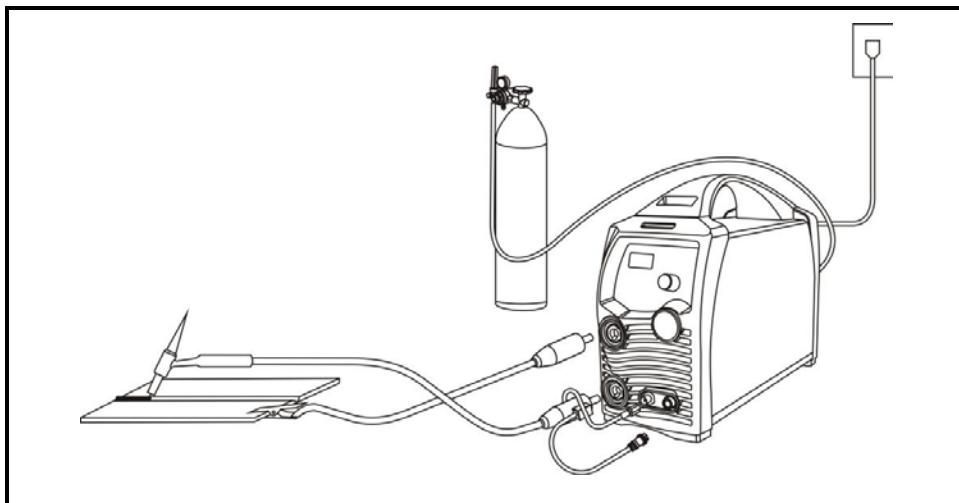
HF arc ignition or lift-arc TIG welding sketch map
